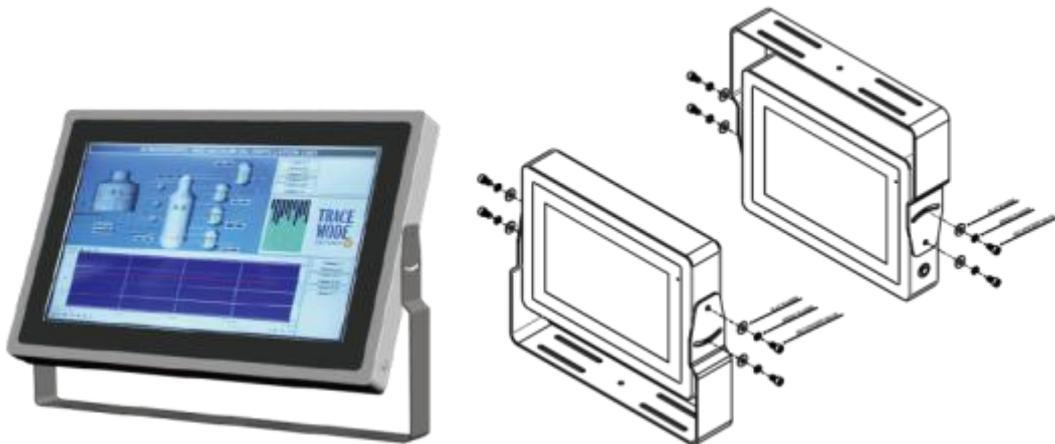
7 Yoke mounting of NuTAM-9XXE Series
